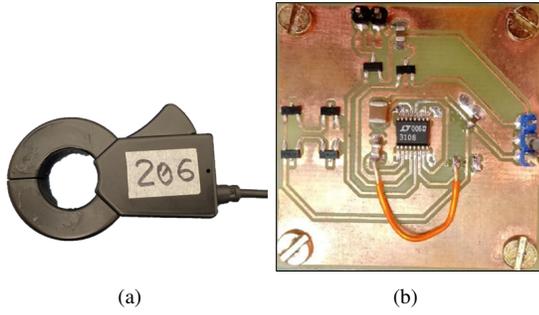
Electronic circuit prototype: (a) CT model LTC-0250 used, (b) PCB built.
